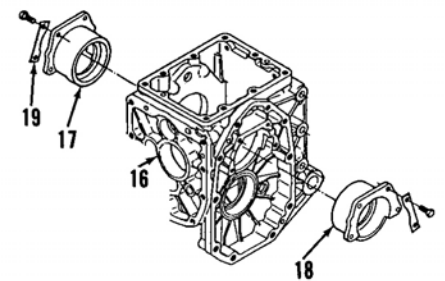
Left differential bearing holder (18) and right differential bearing holder (17) mount to center housing (16). Retaining cap screws are secured by lock plate (19).
